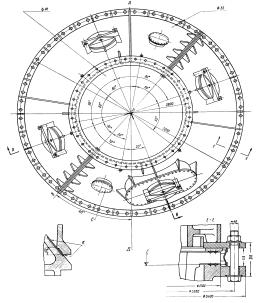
Shaft top charger Model 3AK-13-4800 J — Stroke of large bell B — Level of thrust shaft top ring C — Stroke of small bell D — Level of gas seal flange E — Axis of blast furnace
